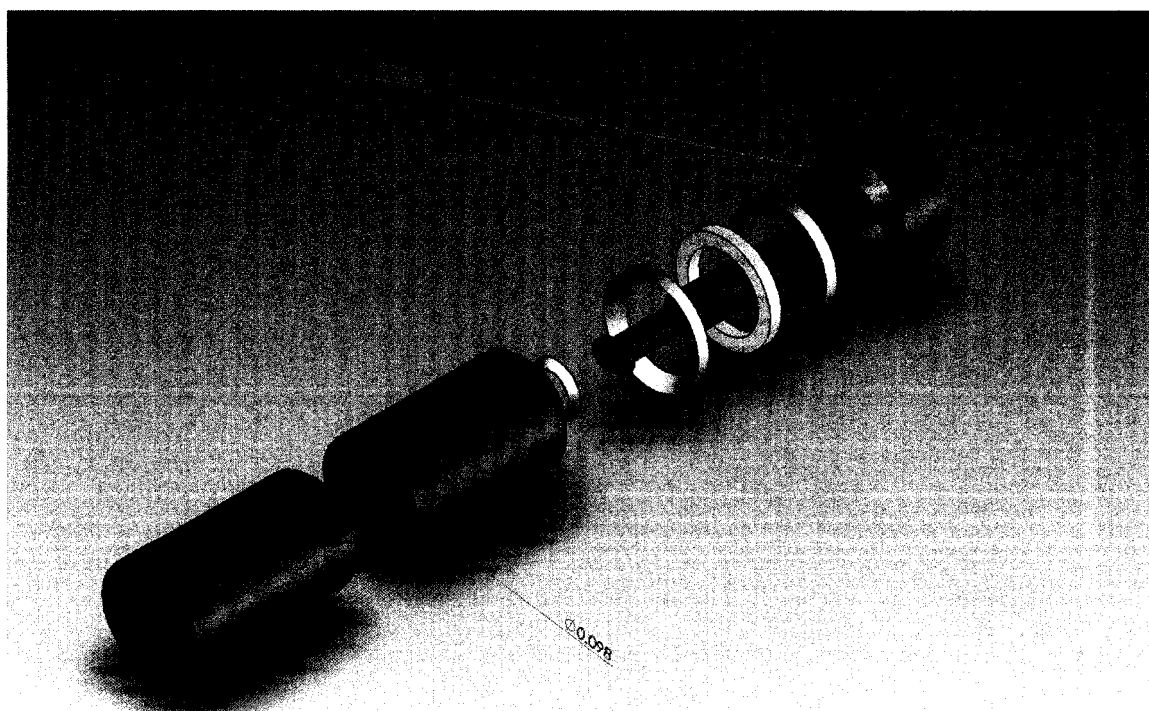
Exploded view of separator piston plug. Three Bridgman unsupported-area seals allow the plug to properly seat and seal to 700 MPa.
